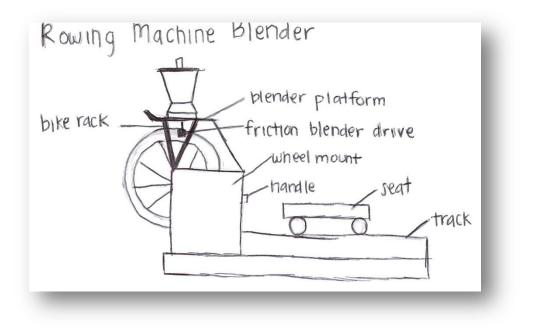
Labeled drawing of a Rowing Machine Blender (Photo (Wong 2011)).
